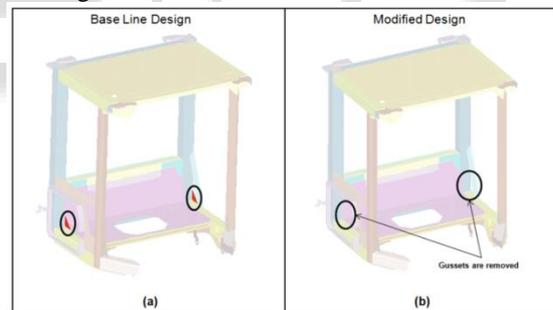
Design Modification - 1(a) baseline design (b) Modified design
